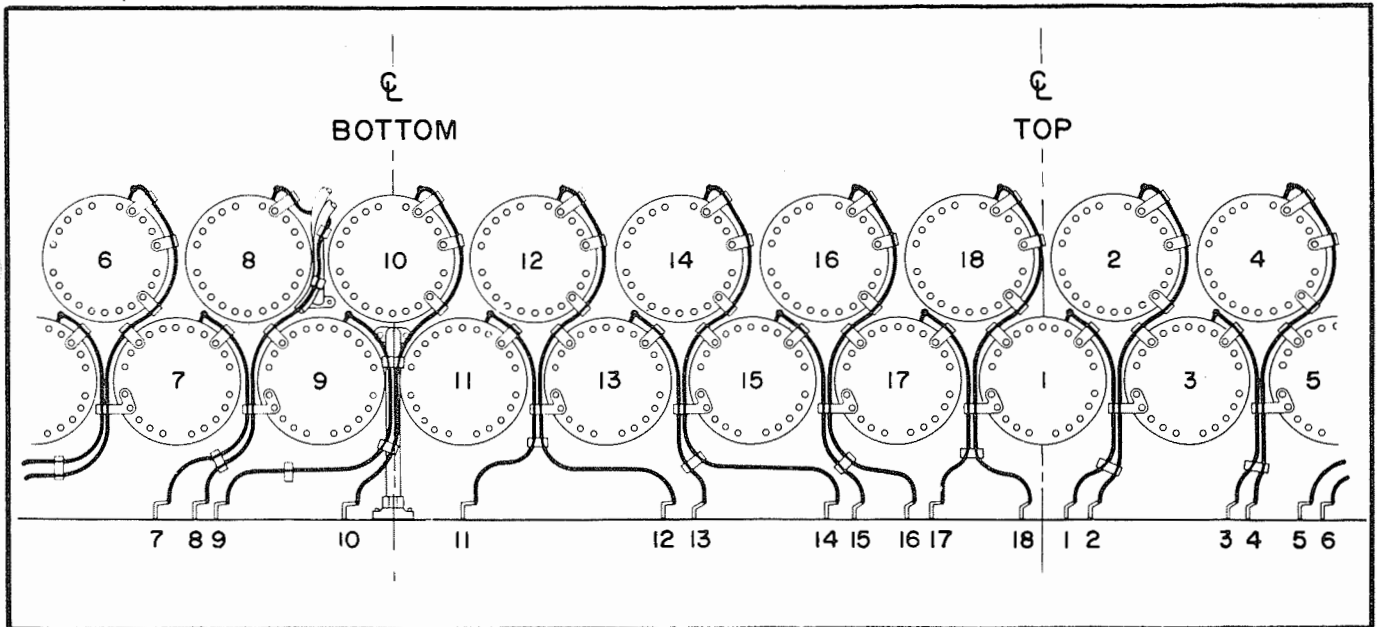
Schematic of Fuel Injection Hose and Clips Positioning
